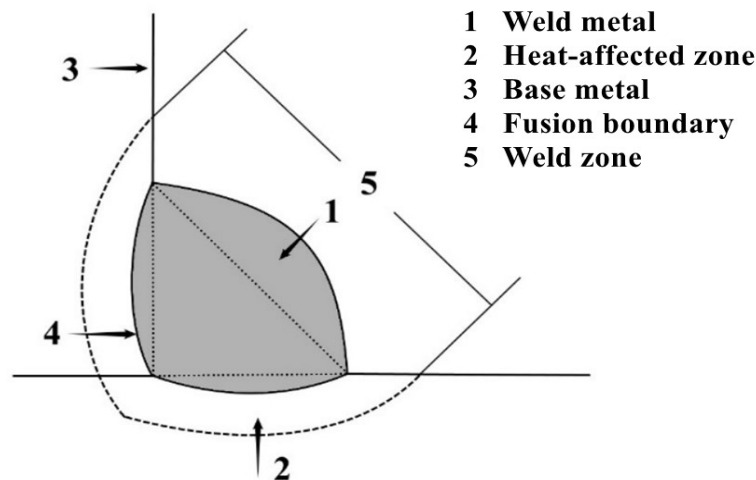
Schematic drawing of a fillet weld.
